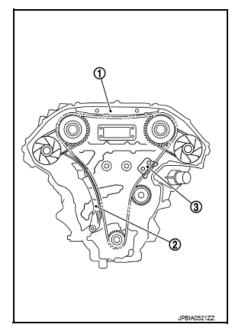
Identifying Internal Chain Guide, Tension Guide And Slack Guide Courtesy of NISSAN NORTH AMERICA, INC.
